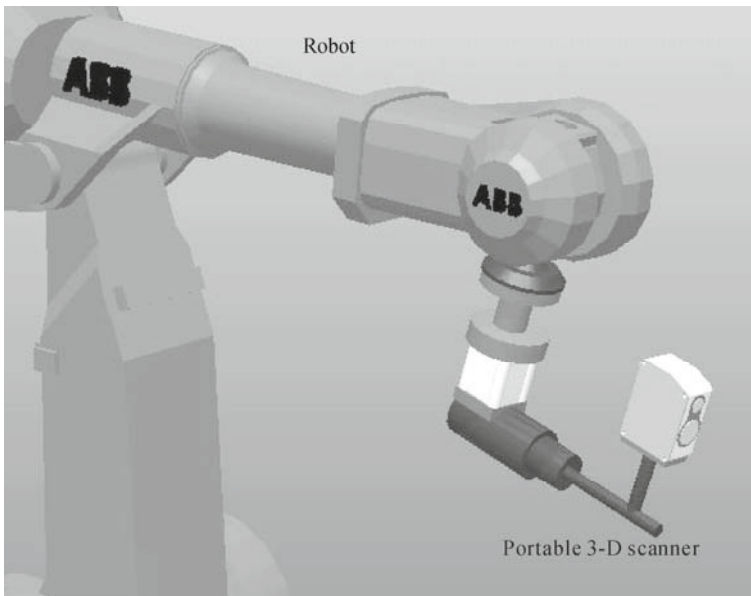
A large-depth-of-view portable laser scanner is used by an industrial robot as a measurement tool
